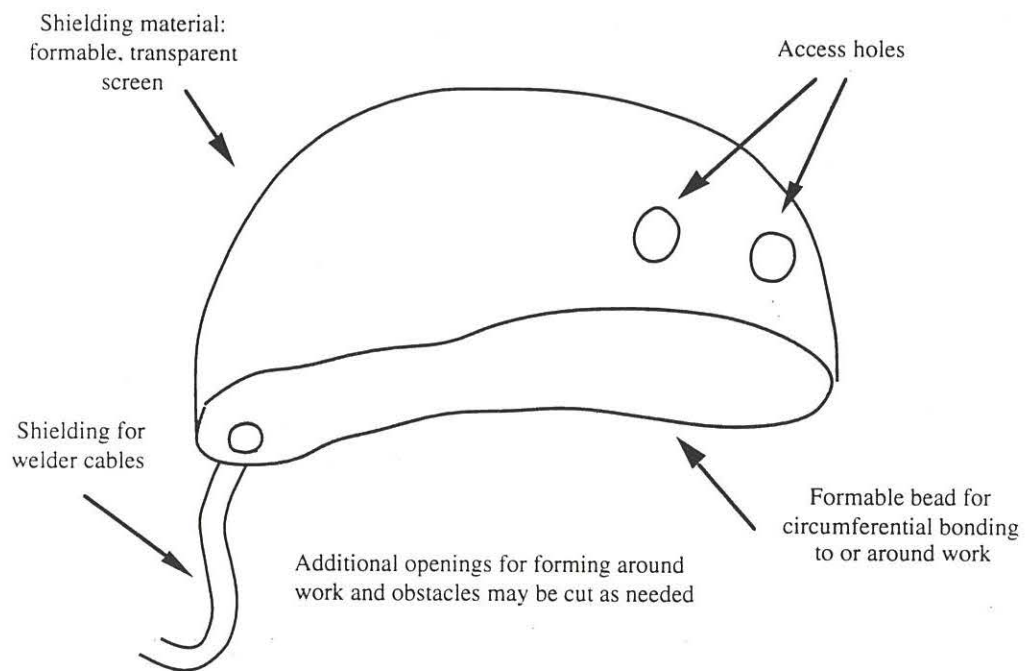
Concept sketch for a light, portable shielding enclosure for the weld site.
